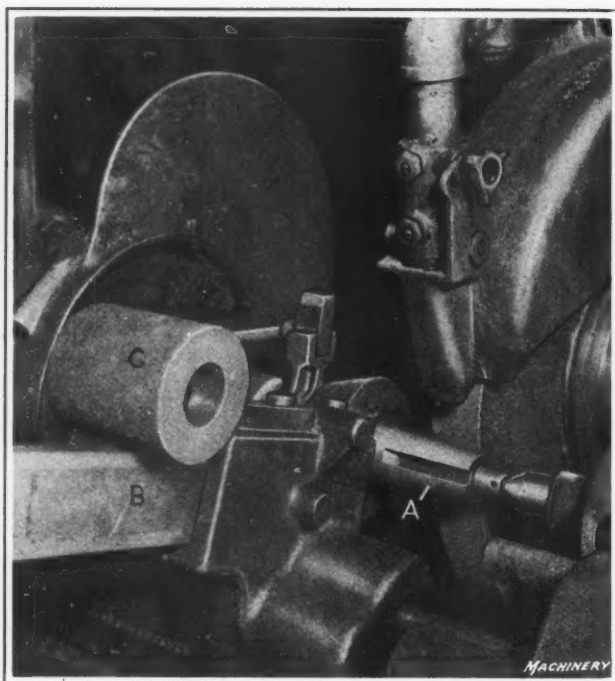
Universal Grinder for grinding the Tapered Shanks of Driving Pinions
